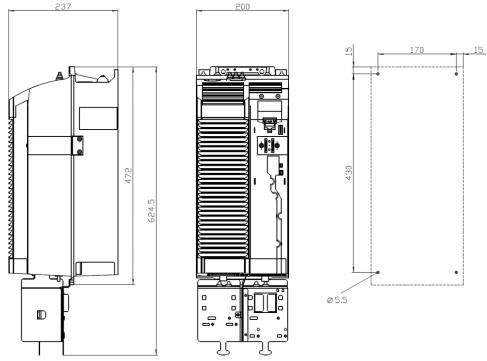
Dimension drawing, PM240-2 Power Module, frame size FSD; all dimensions in mm and (inches)
